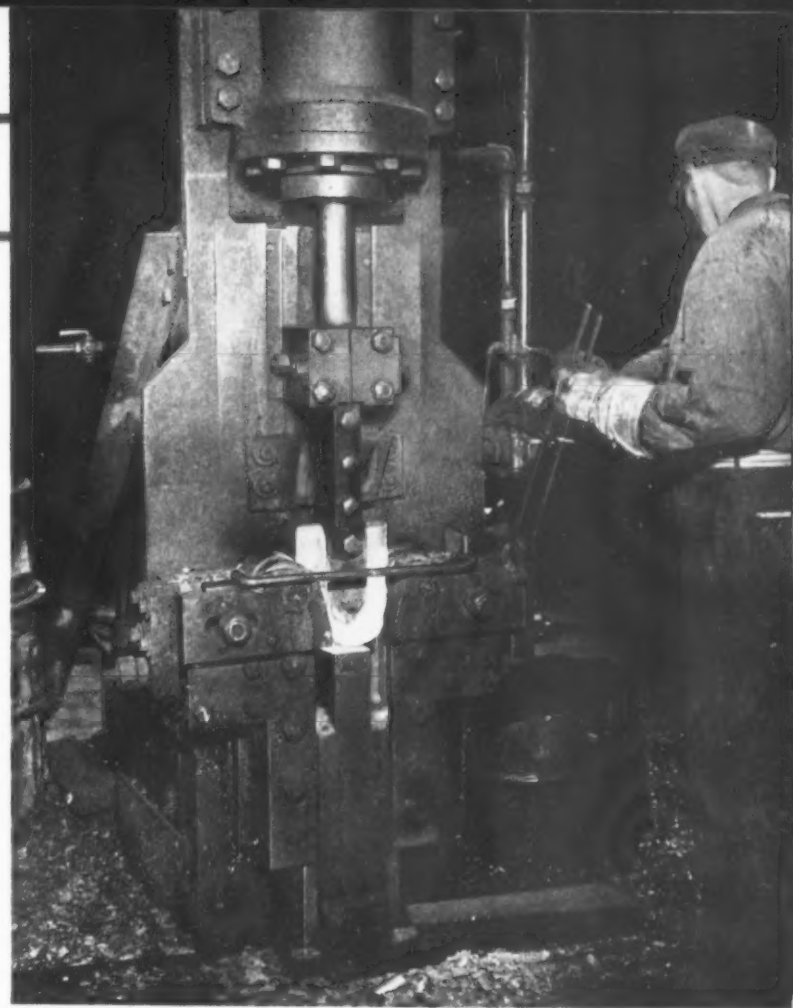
The First Step in Forging the Female Link Member Consists of Bending a Heated Bar to a U-shape
